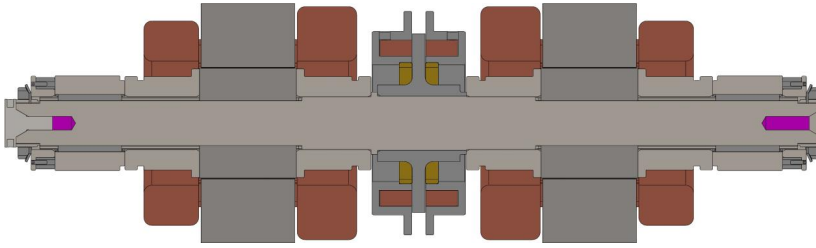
Cross-section of the bearingless machine with distributed windings.
